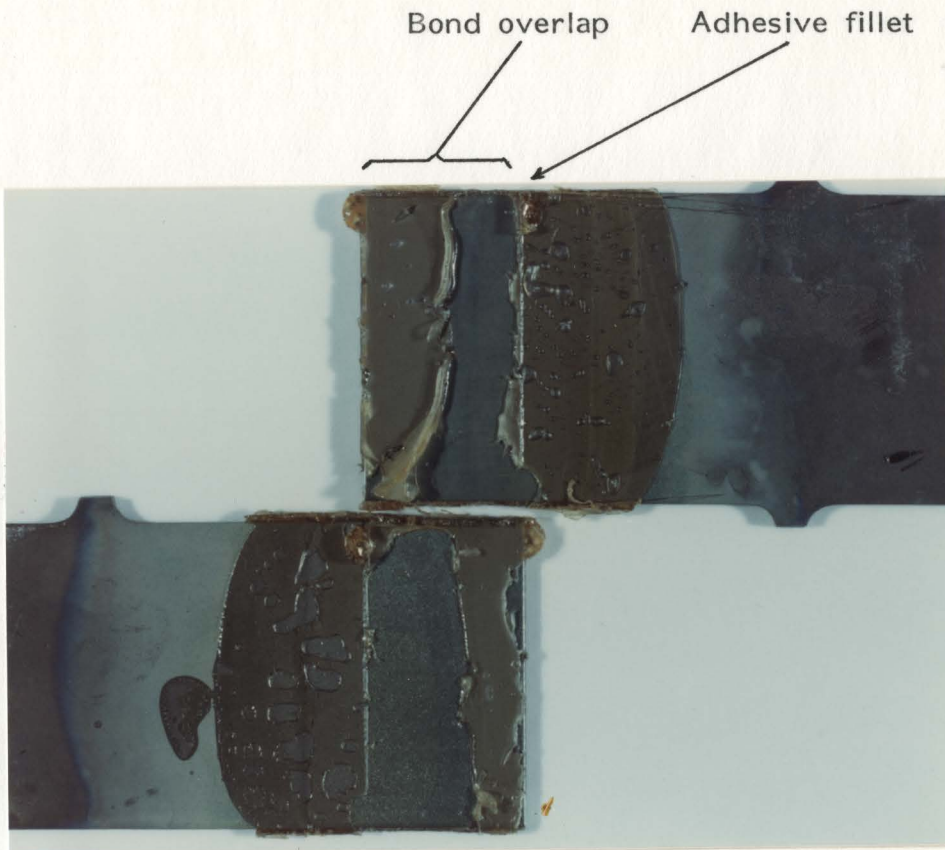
Photograph of a Fracture Surface for a Single Lap Bond Illustrating Apparent Failure III.
